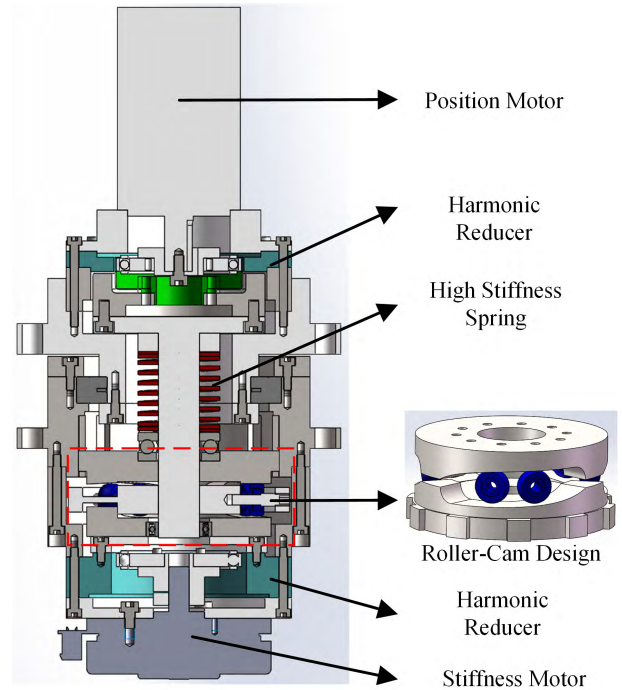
Mechanical design of variable stiffness actuator based on roller-cam mechanism. Three pairs of roller are connected to the output link and driven by position motor. One cam disk is fixed to link side and the second to stiffness motor. The cam disks are axially pushed together by the high stiffness spring and are rotationally supported by multiple spline (not shown).
